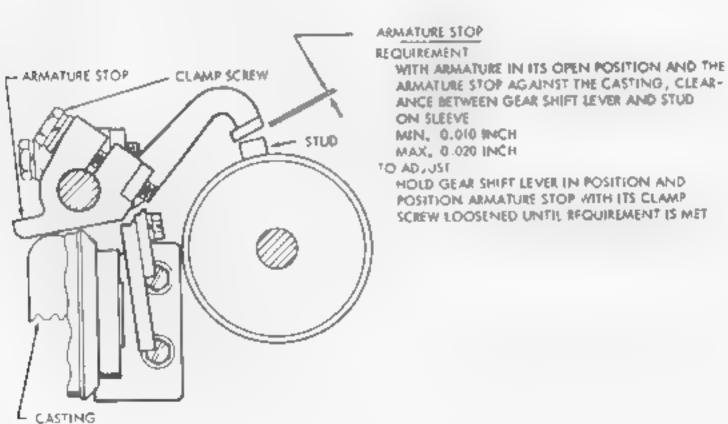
REMOTE CONTROL GEAR SHIFT MECHANISM
